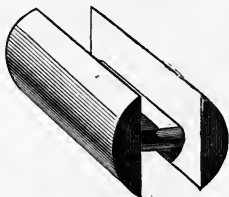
Armature Casting for Shuttle-Armature Motor.
